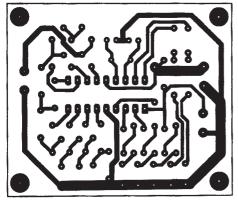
Actual-size single-sided PCB layout for the schematic diagram of Fig. 5
